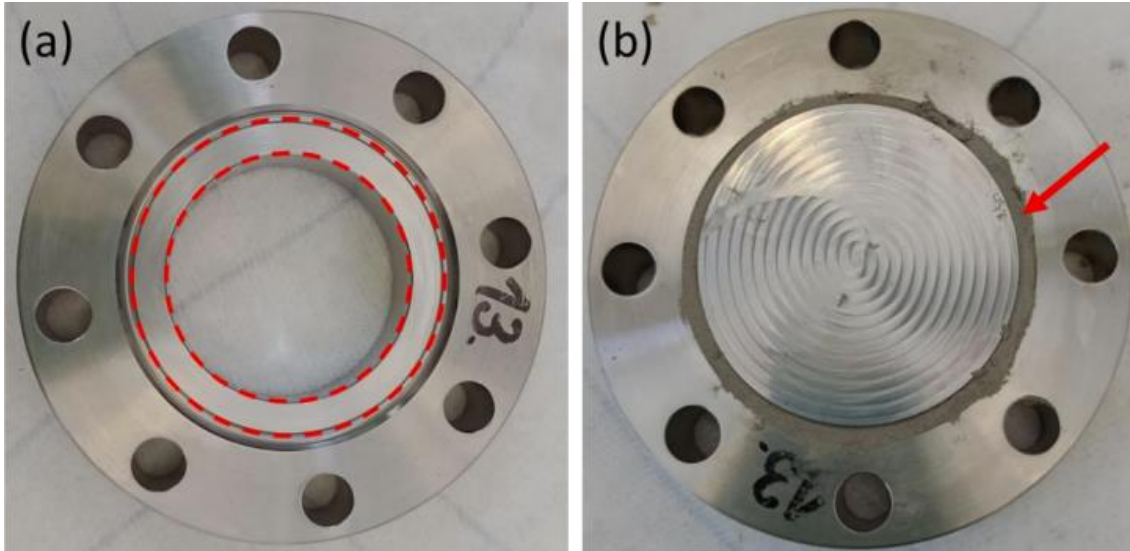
(a) Flange prior to the assembly (as machined). Region where brazing material was deposited is highlighted between dashed lines; (b) Flange and window after brazing material was deposited (still before brazing). Excess of brazing material flows to the neighbouring cavity (red arrow).
